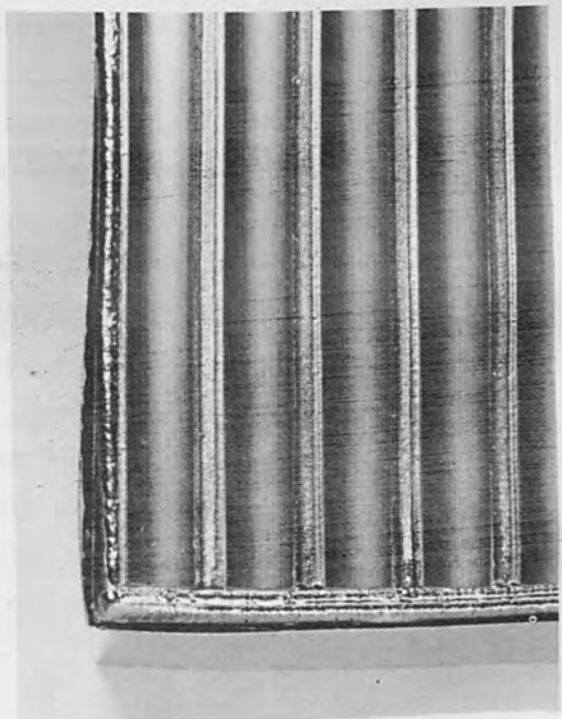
Close view of sealed and welded 2-5/8 x 4 in. multistrip ionizer
